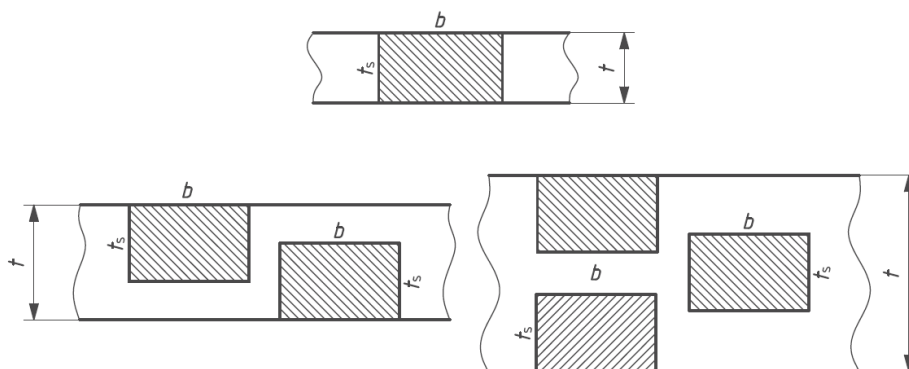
Root and face bend test specimens for a butt weld (TFBB, TRBB, LFBB and LRBB).
